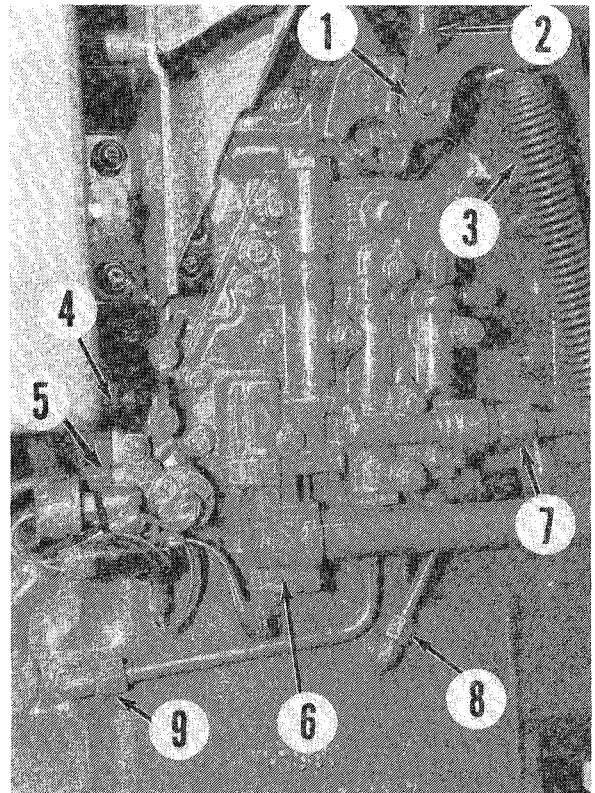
Traction clutch valve housing is mounted on left side of clutch housing.
